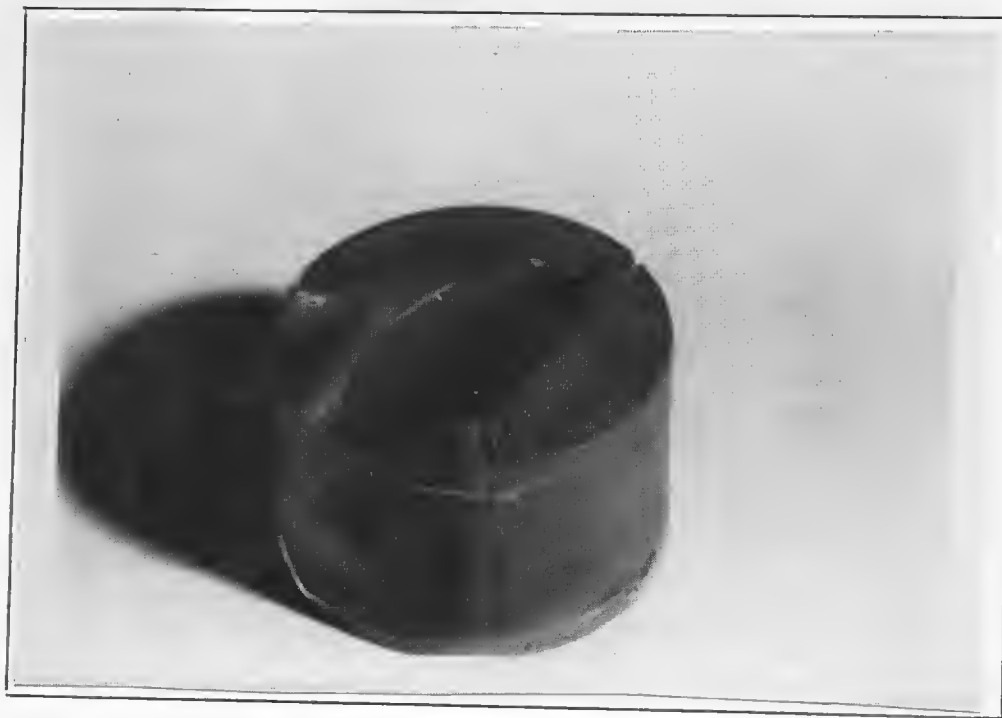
Longitudinal Weld Seam, incomplete penetration;
